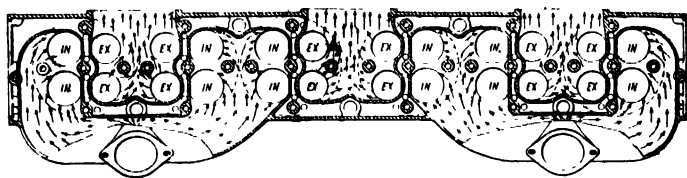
Sectional View of Packard Valve Housing Showing Location and Porting of Valves, Four Valves Being Used for Each Cylinder.
